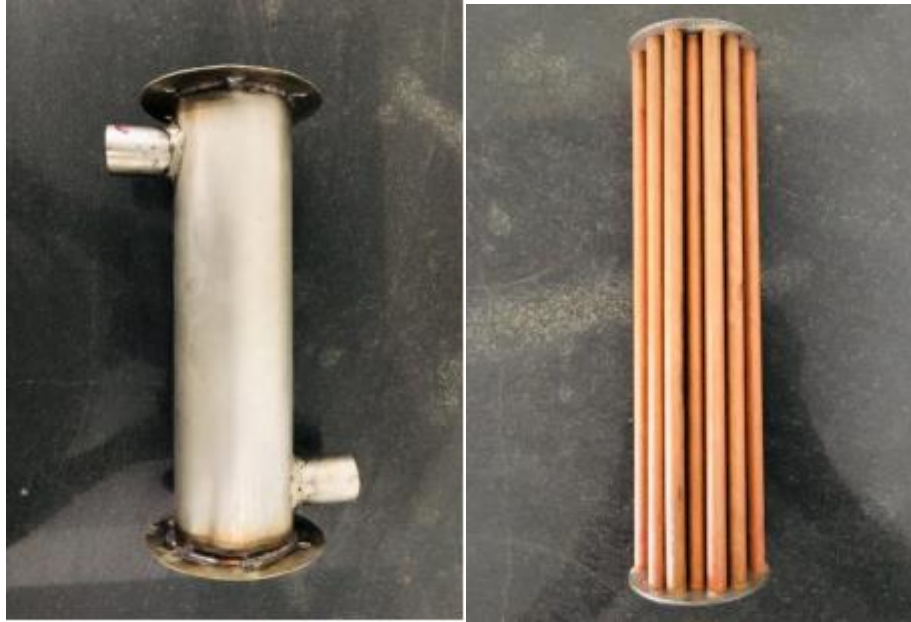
Shell and tube arrangement in EGR Cooler development-1
